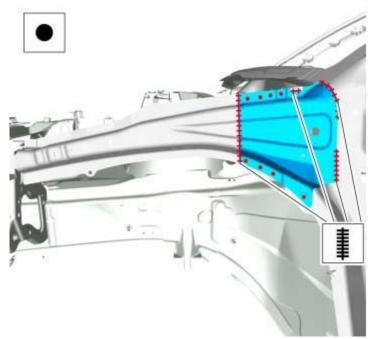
Removing/Installing A-Pillar (5 Of 8) Courtesy of VOLVO CARS CORPORATION
